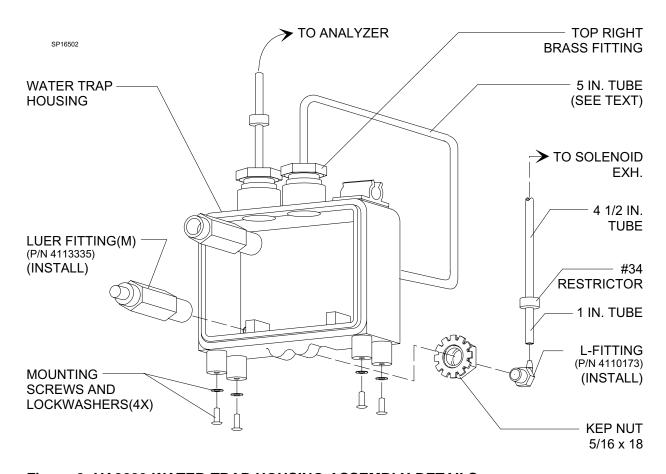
VA3000 WATER TRAP HOUSING ASSEMBLY DETAILS
